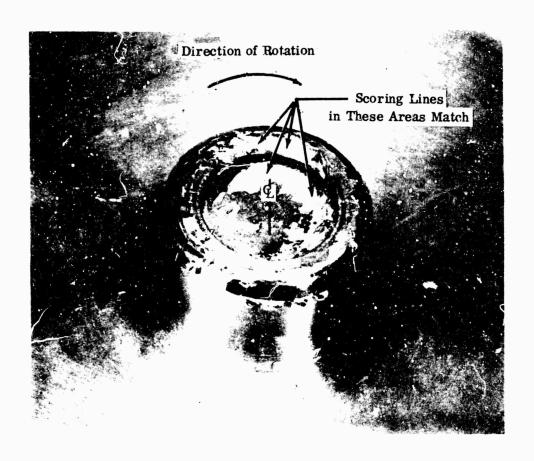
Broken Arbor at the Upper End of Impeller MF-2 After Attempted Proof Spin.
